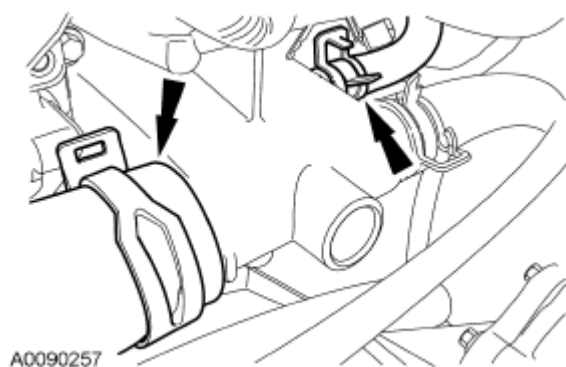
Locating Upper Radiator & Coolant Vent Hoses
